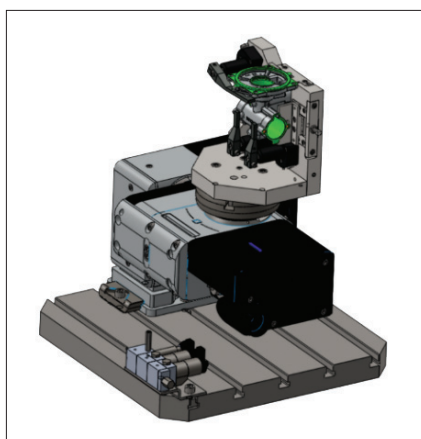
Tooling for extending the machine tool kinematic chain based on a swivel rotary table and a special machining chuck [3]
